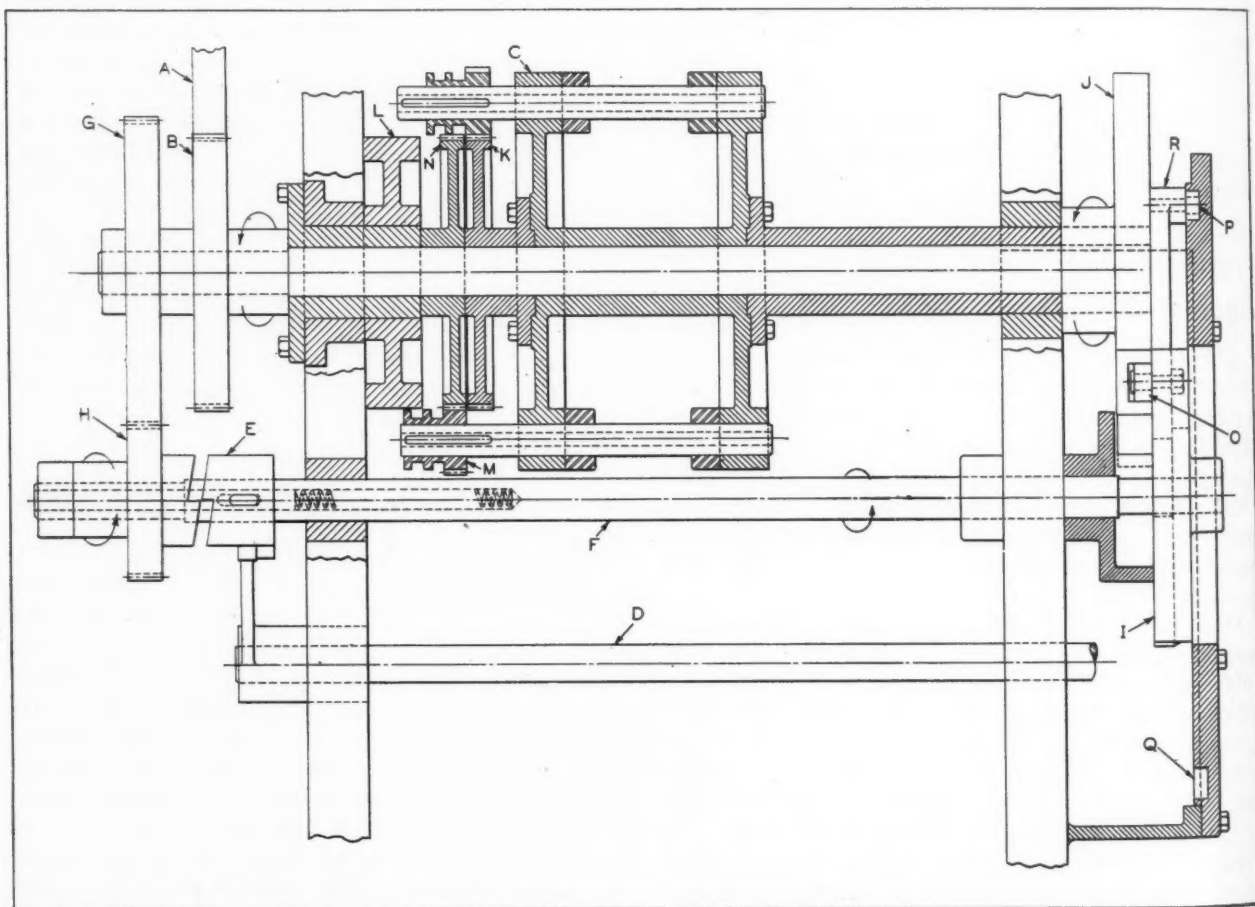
Geneva Motion Mechanism of Special Design Developed to Obtain Uniform Indexing Speed
